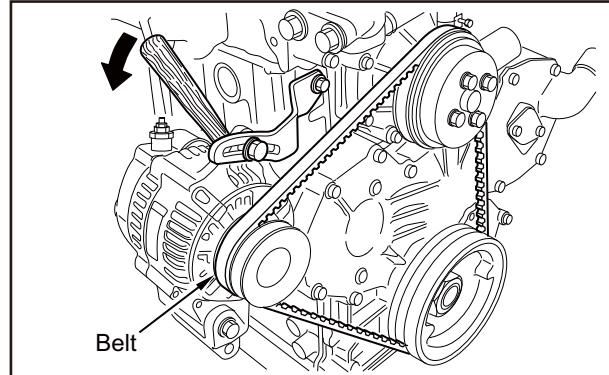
Belt and belt tension - Inspect and Adjust
